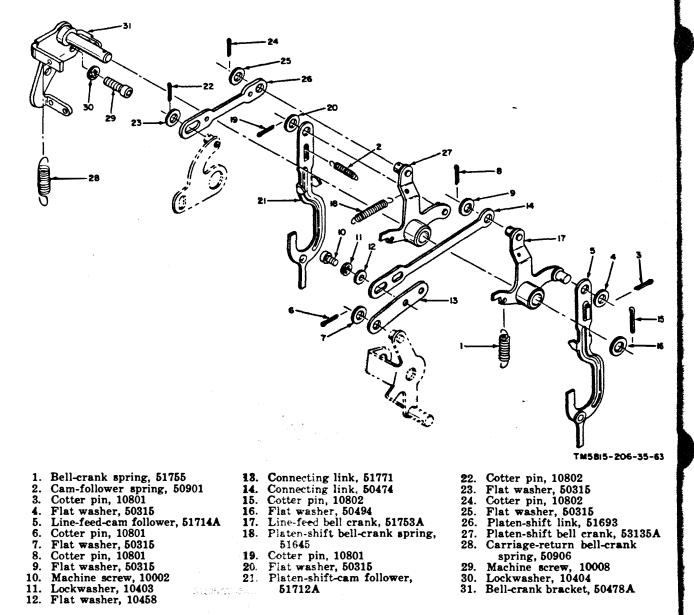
Line-feed and platen-shift mechanisms, (TT-4/TG), exploded view.
